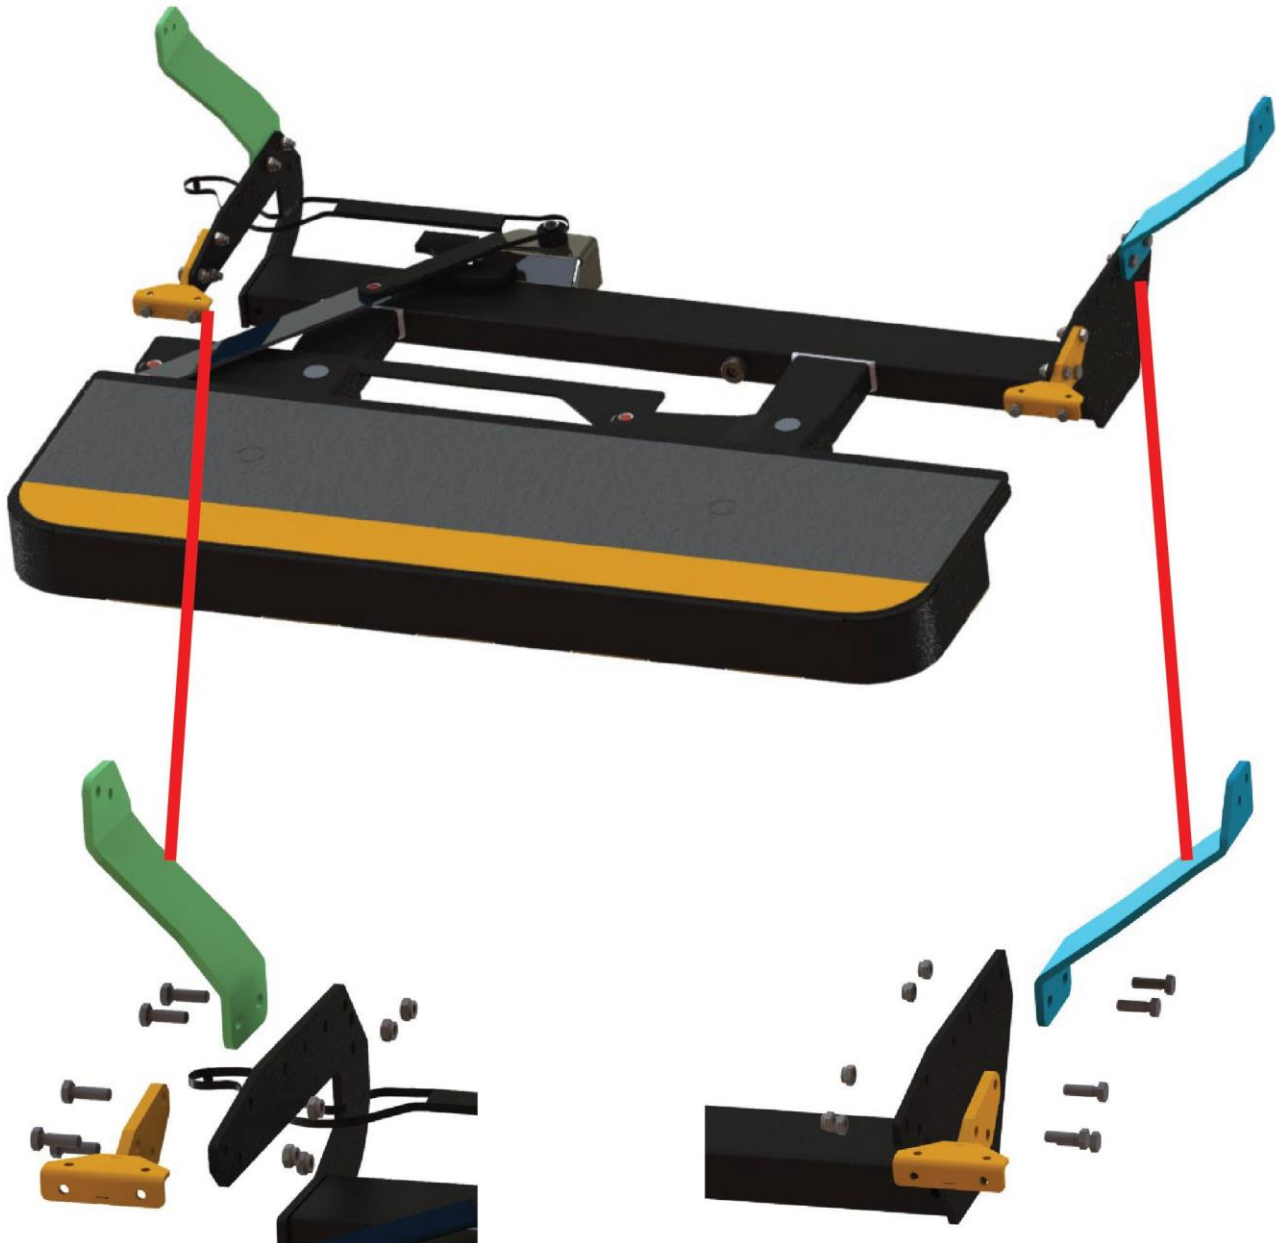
MOUNTING KIT ON X3 STAGE "EXPLOSION".
